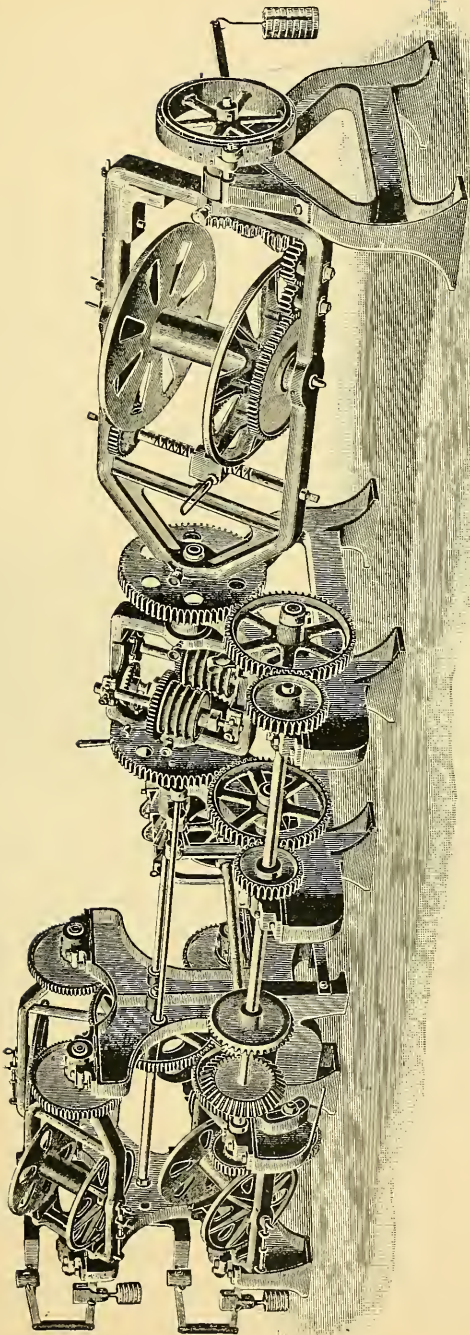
3- or 4-strand layer or closing machine to lay rope from 1 inch diameter to 2 inches diameter.
